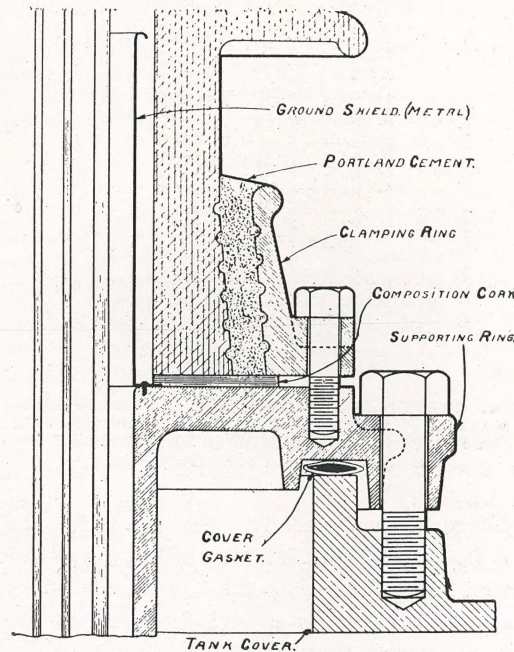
DETAILS OF FLANGE CLAMPED JOINT OF FILLED TYPE HIGH VOLTAGE BUSHINGS
